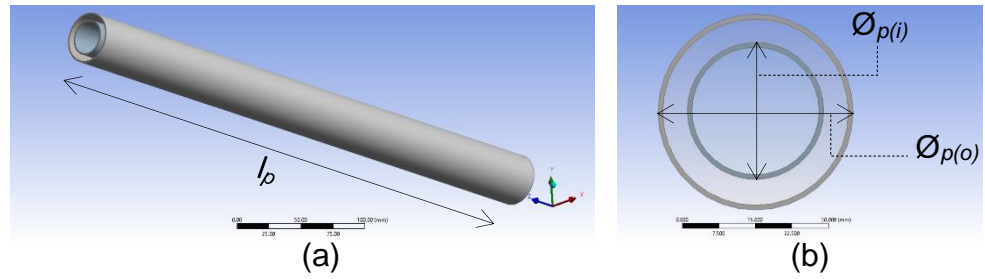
EPCM-T shell-tube cylindrical EPCM-T (model 2A): (a) 3D- view (b) plan view
